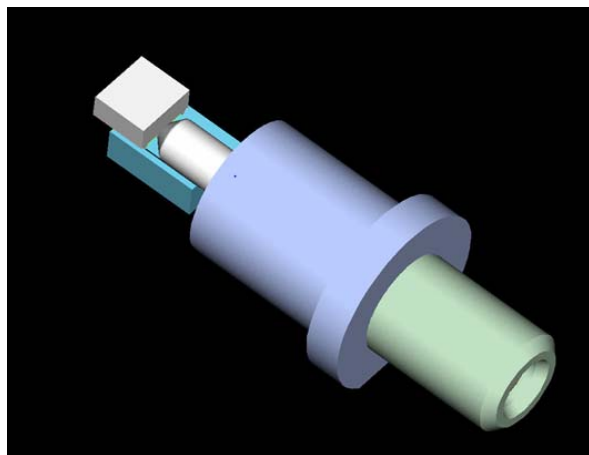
Wide Alignment Groove (WAG) is used to accurately position and provide stability to assembly.
